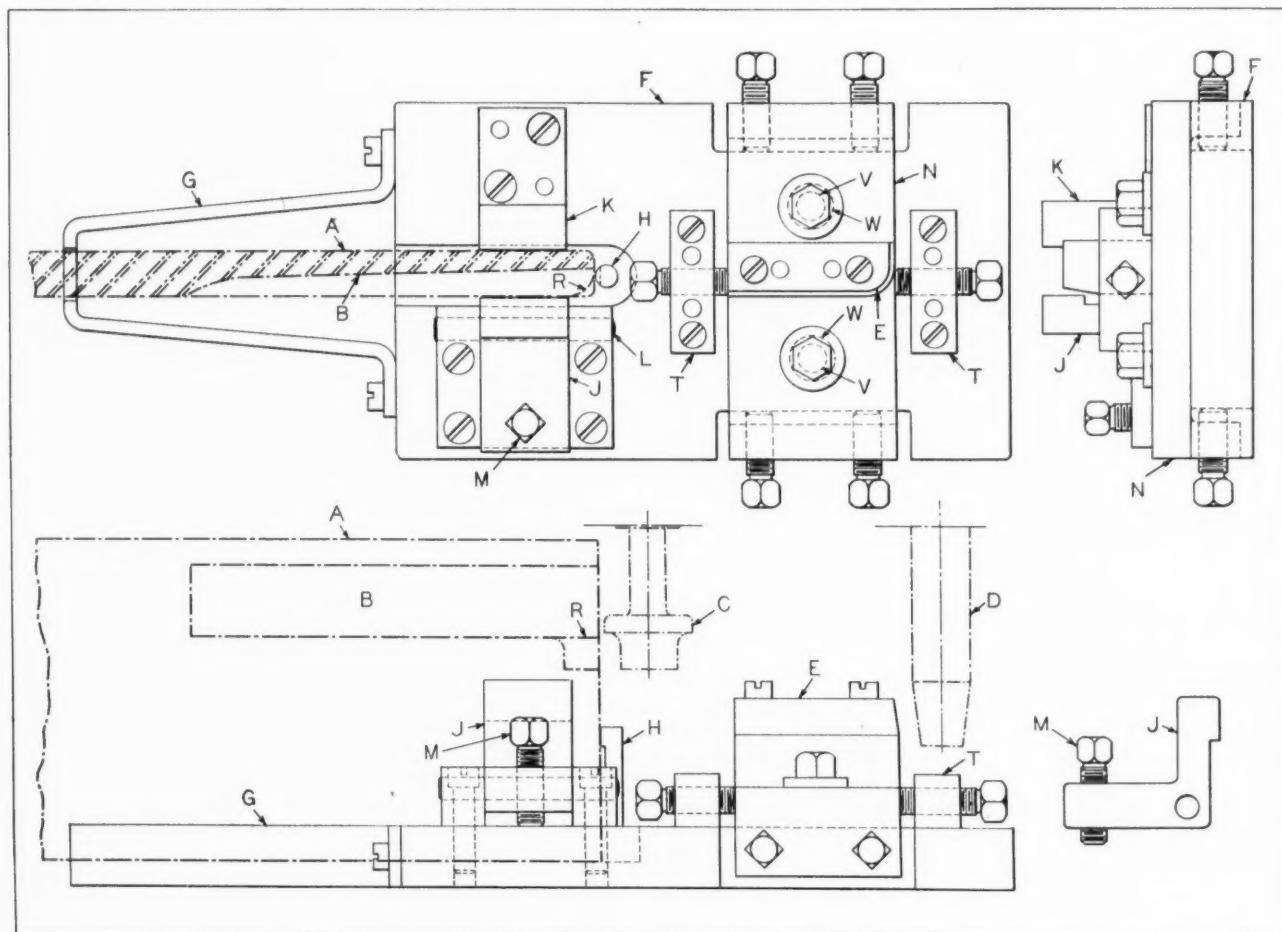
Fixture Equipped with Adjustable Forming Block for Milling Radius *R* on Work Shown by Heavy Dot-and-dash Lines
